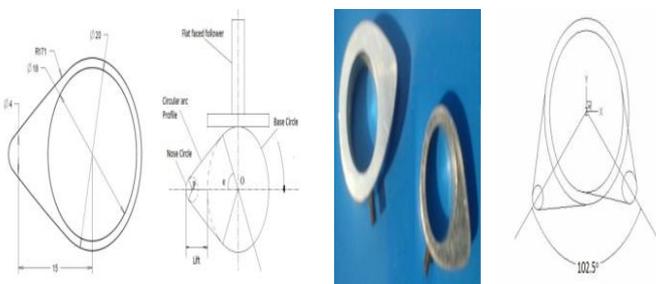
Inlet circular arc cam front view with Flat follower and Angle between cam
